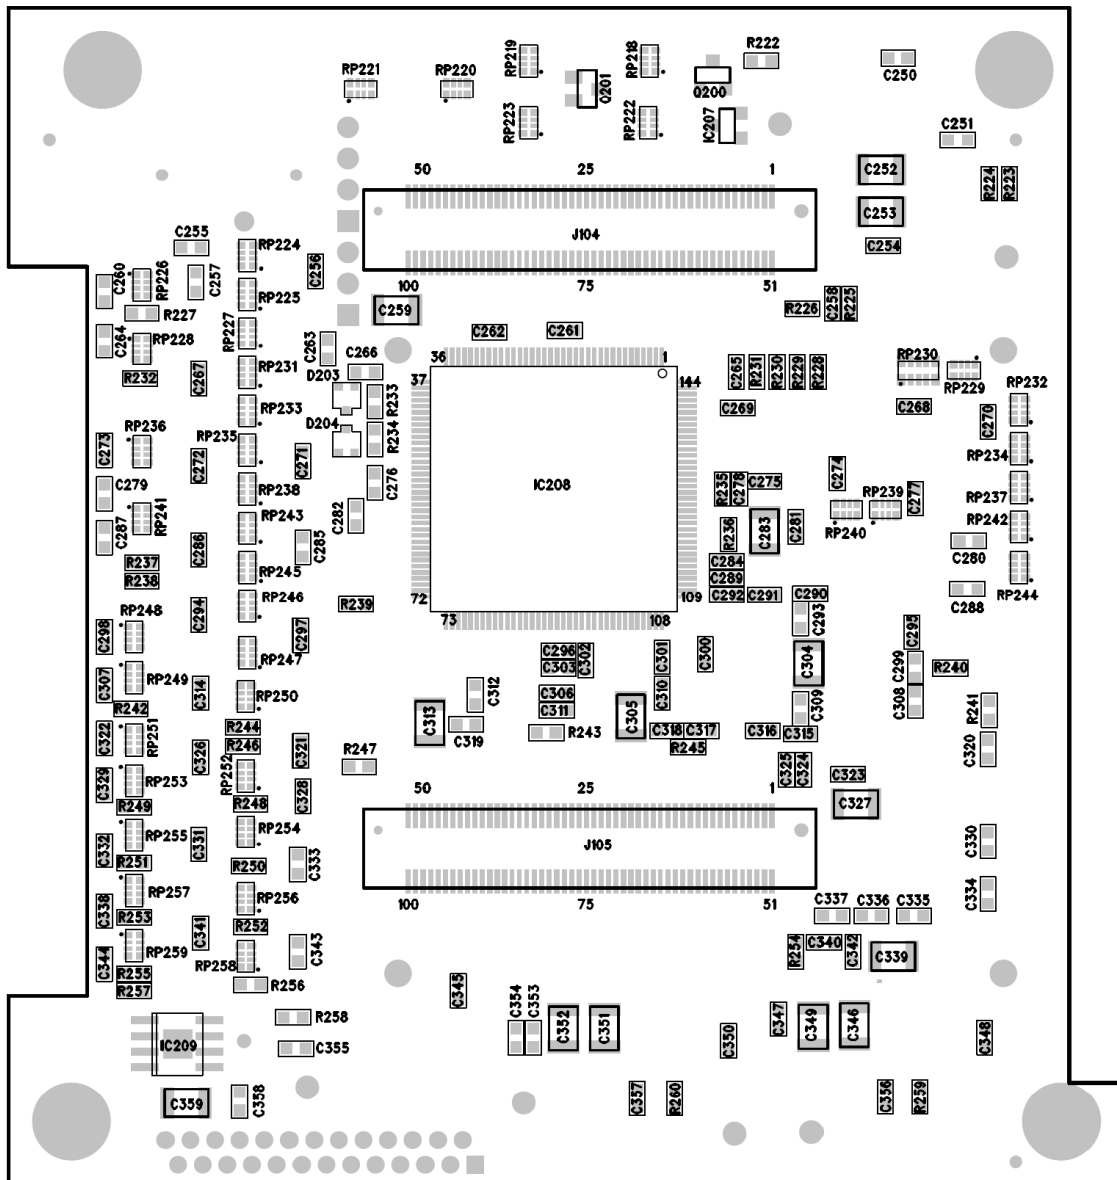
TOP BOARD, BOTTOM SIDE COMPONENT PLACEMENT
